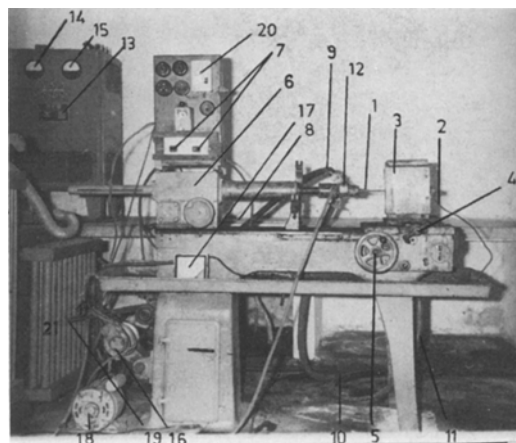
Electrochemical machining apparatus. 1. Tool. 2. Workpiece. 3. Plastic box. 4. Wheel for transverse movement. 5. Wheel for axial movement. 6. Feed gear box. 7. Feed direction change knobs. 8. Feed selector. 9. Electrolyte supply pipe. 10. Overflow pipe. 11. Out-flow pipe. 12. Cable for connecting tool with power terminal. 13. Rectifier unit. 14. Ammeter. 15. Voltmeter. 16. Cone pulley. 17. Fine range voltmeter. 18. Electric motor to drive feed mechanism. 19. Variac. 20. Electric connection board. 21. Main transformer.
